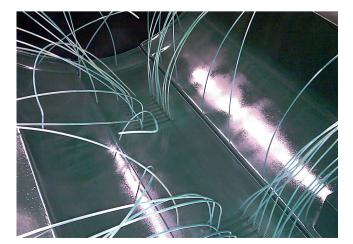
Saving on drilled vacuum holes: where a vacuum is to be applied in the thermoforming mold later, siliconesheathed steel wires used during pattern preparation keep the cavities open during casting © Alwa least 3 to 4 layers in the case of fine structures). The copper pipes or heating elements attached to the perforated aluminum sheet and the displacer can now be affixed to the pattern. Drive-in nuts for better demolding or later mounting to the thermoforming machine should be incorporated into the pattern.
